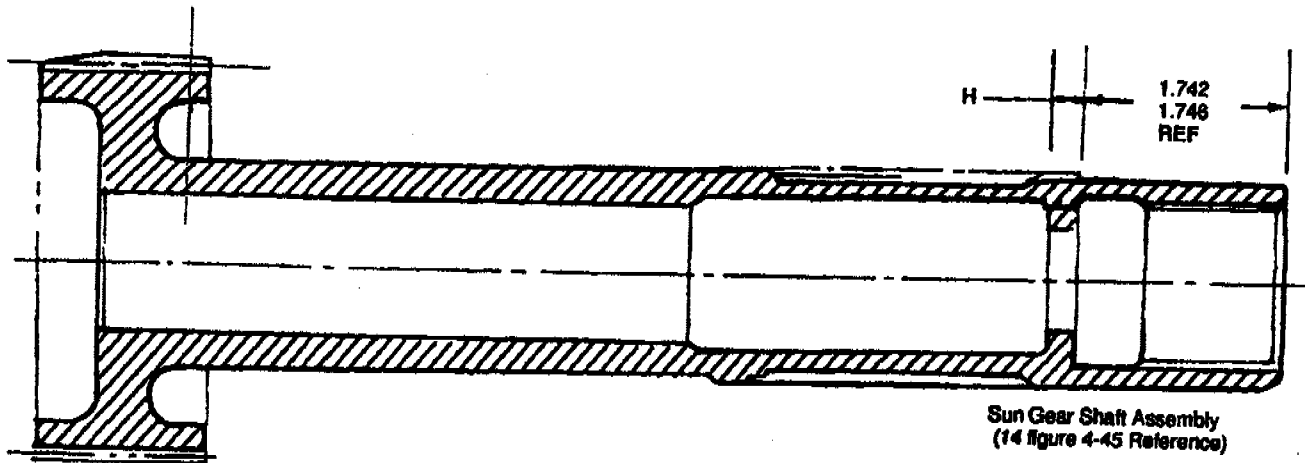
Primary Reduction Gear Assembly Dimensional Inspection Locations (T53-L-701, -701A) (Sheet 2 of 3).
